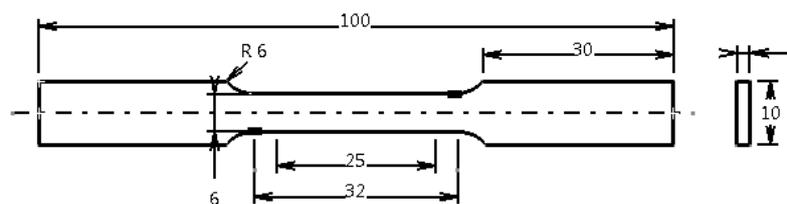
Specimen dimensions of the uniaxial tensile test (dimensions in mm)
